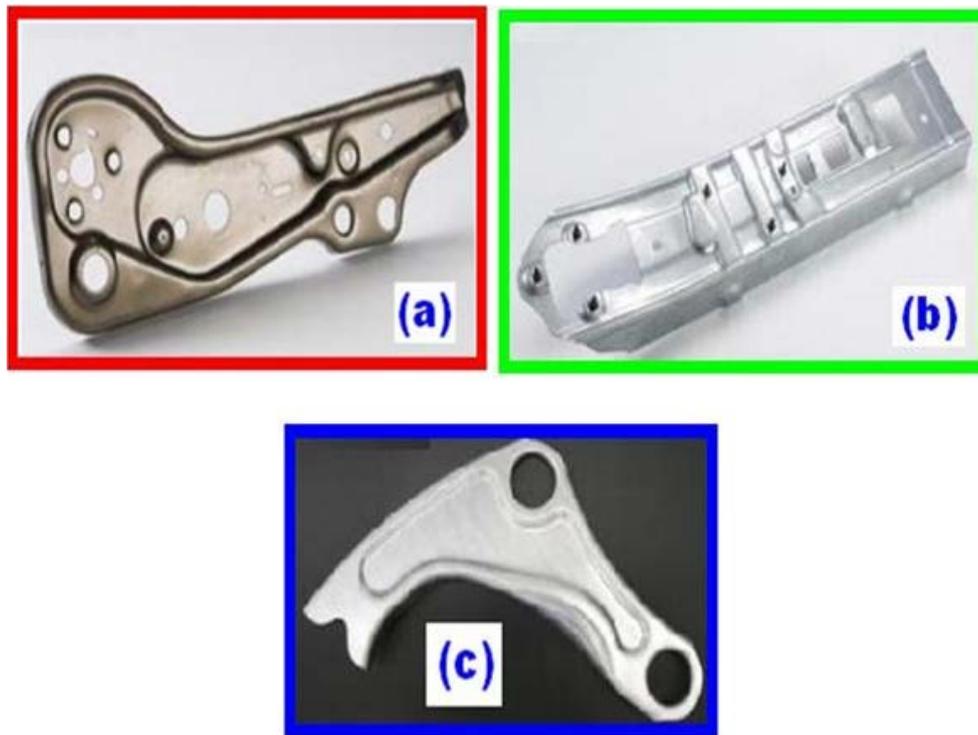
(a) Seat Flange, (b) tunnel stiffener and (c) suspension arm made by CP 600,800 Steel (Reprinted from [87])
